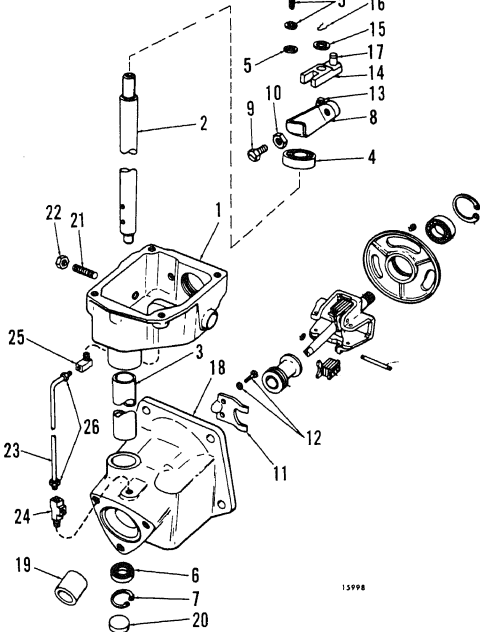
MECHANICAL GOVERNOR HOUSING
